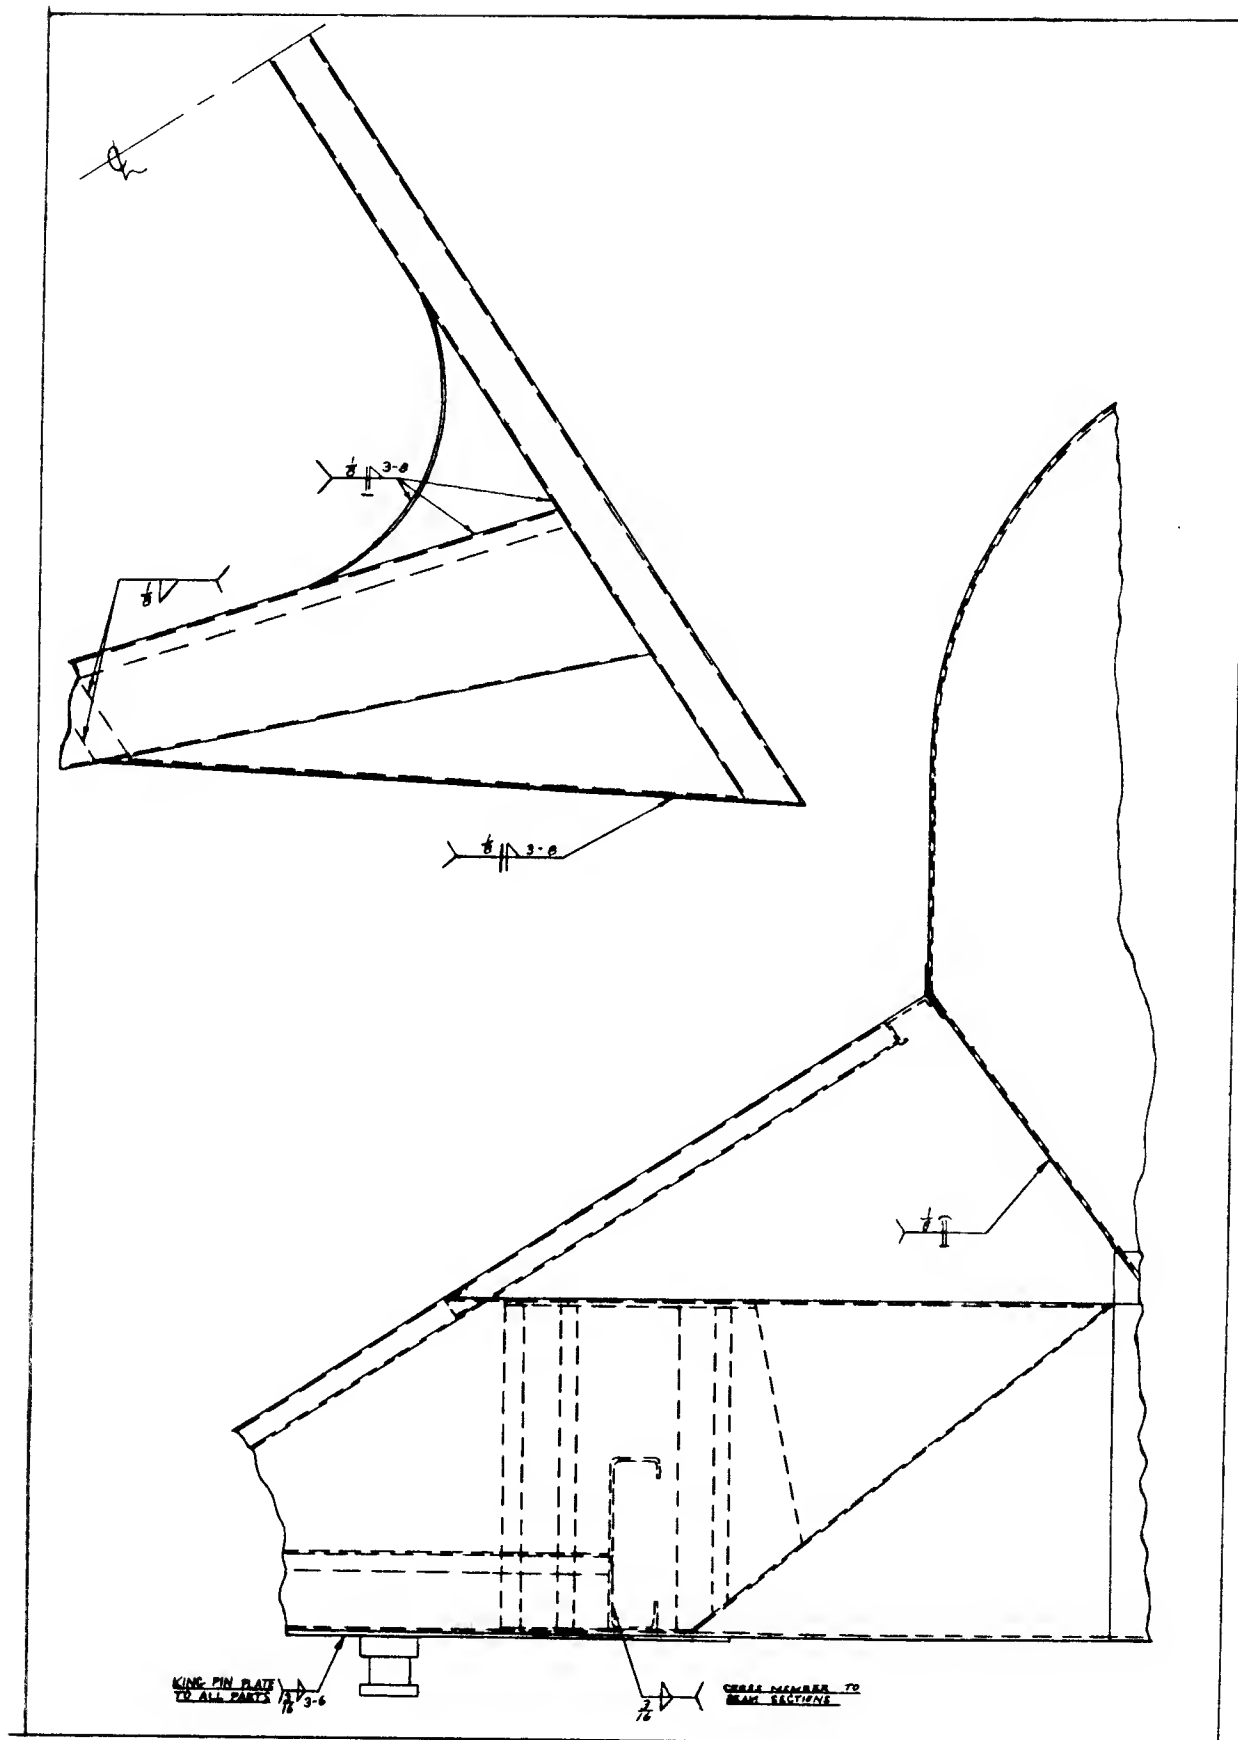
Layout of Joint Between Compression Member and Crosswise Channel on Hopper Wall After Redesign of August, 1954.
